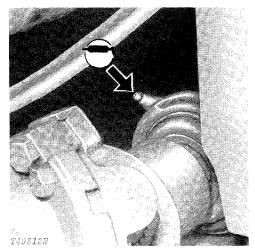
Lower Drive Shaft Support Bearing (1 Point)
